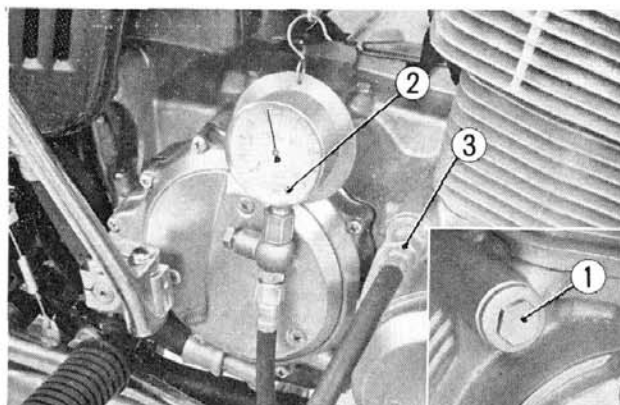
① Oil path cap ② Oil pressure gauge ③ Adapter
